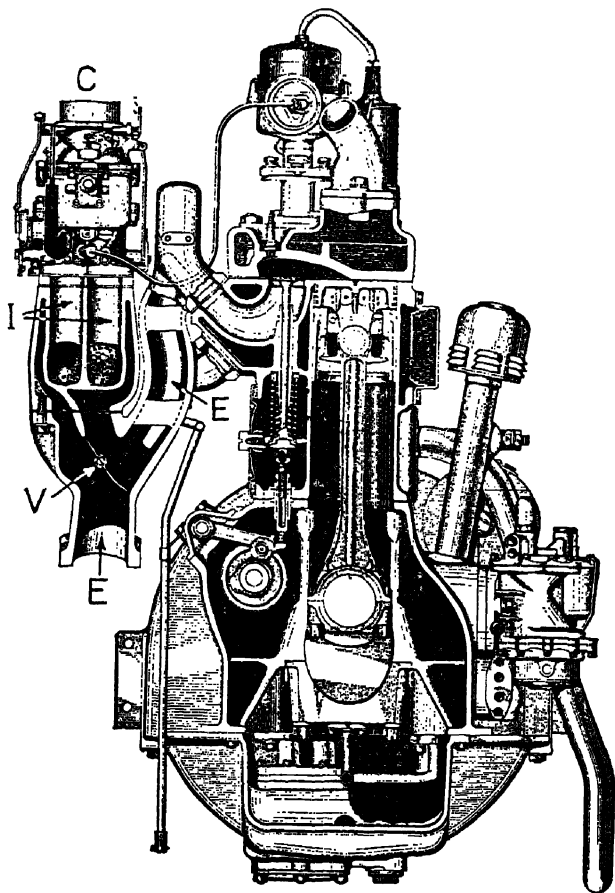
The Packard Engine, showing Carburettor Unit on left. C, Down-draught Carburettor. I, Dual Inlet Manifold. E, Exhaust Gas Manifold. V, Exhaust Gas Control Throttle for Carburettor Heating.
